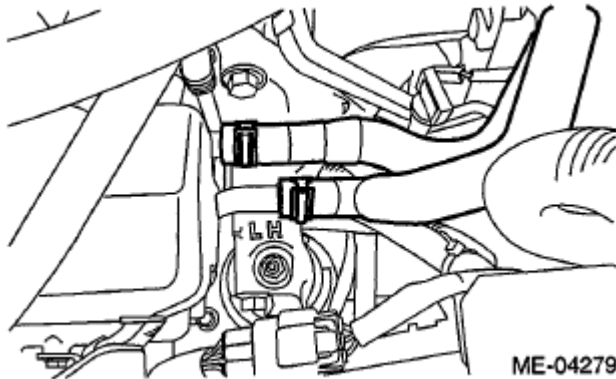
Identifying Heater Inlet Hose And Heater Outlet Hose
